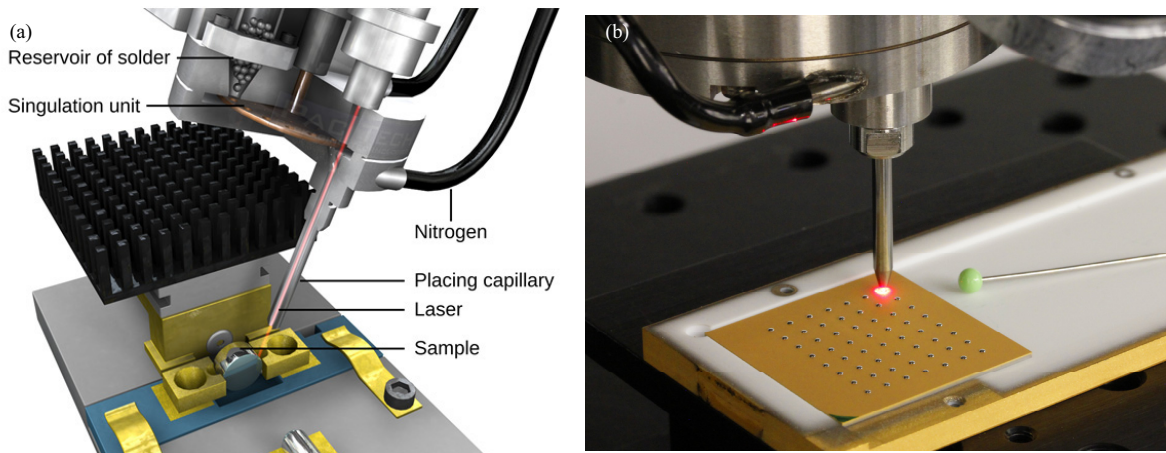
The Solderjet Bumping process. (a) Schematic of the Solderjet bond head. (b) Photograph of the used setup showing the bond head with activated pilot laser for positioning and the specimen with a simple holding arrangement (pin head for scale).
